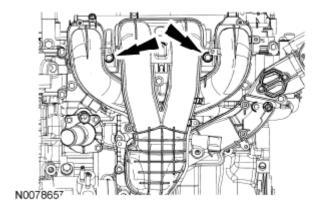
Identifying Lower Intake Manifold Bolt Courtesy of FORD MOTOR CO.
